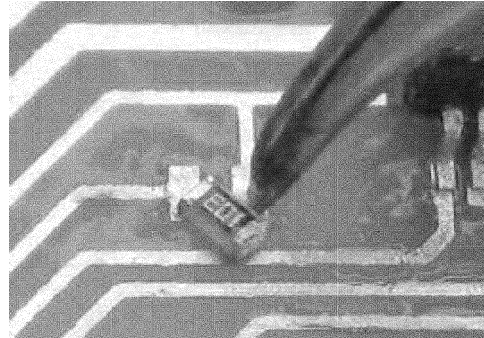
Gently push against the component after soldering, to verify that a solder joint has formed. In this example, no solder joint has formed.
